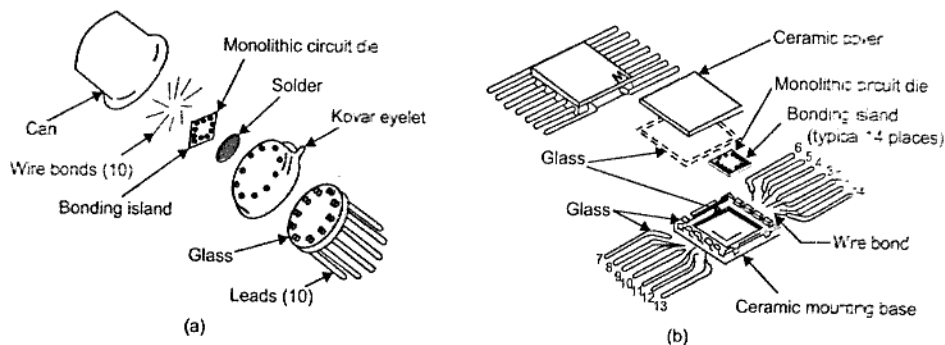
Exploded view of (a) TO-5 metal can package (b) 14-lead version of the flat package, showing the various components as well as the completed flat package
